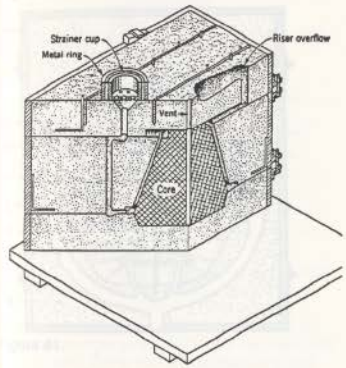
Three-part mold sectioned to reveal riser and off-set sprue
